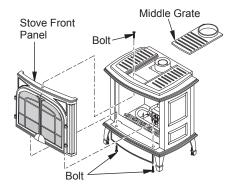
Removing Front Panel from Stove (Oxford™ Model Shown)
